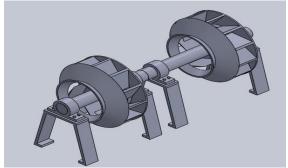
, lift and thruster impeller assembly on the stand (isometric view)
